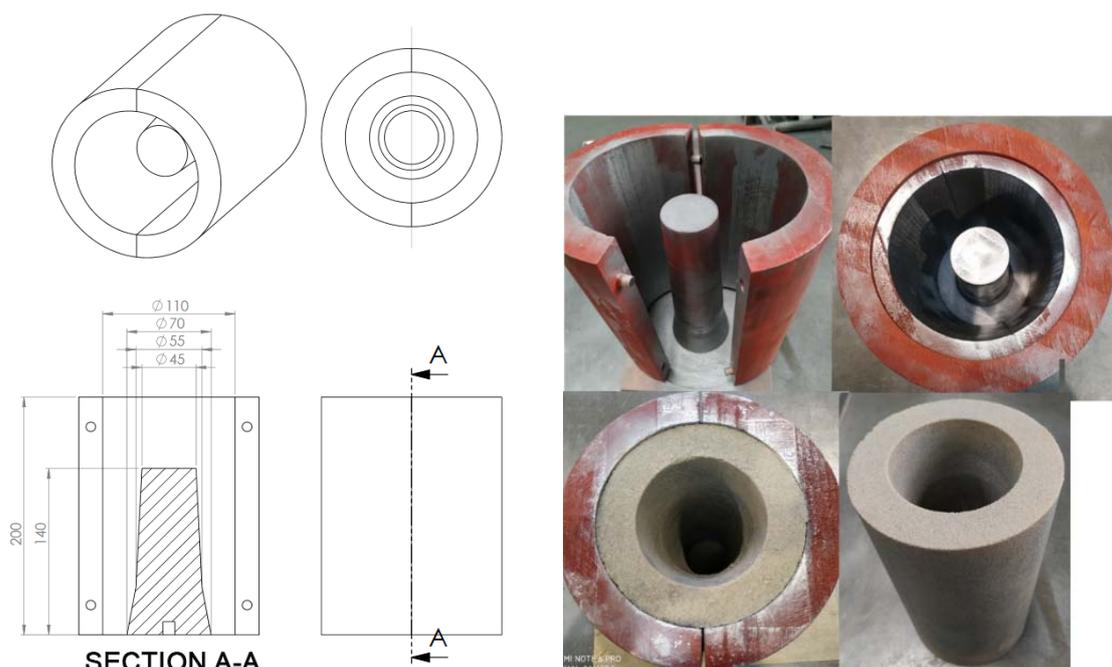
The matrix and sand mould dedicated to the modified ablation casting
